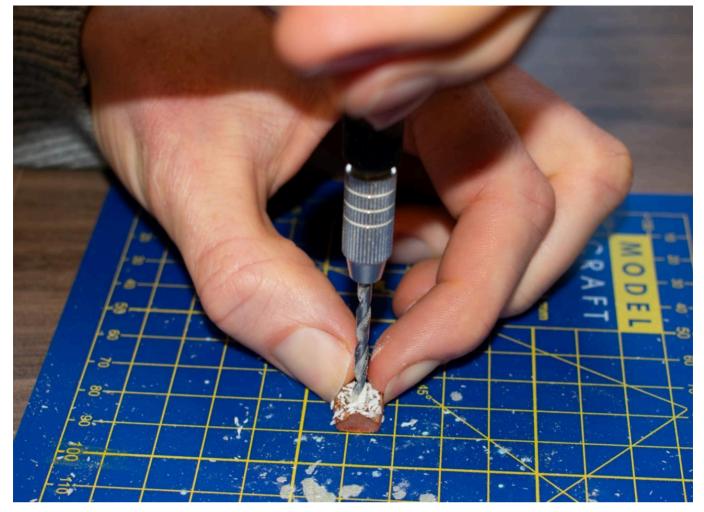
DRILLING AN AMBER BEAD-BLANK USING A HANDHELD DRILL FITTED WITH A 3 MM STAINLESS STEEL BIT. PHOTO BY KATIE HAWORTH.
